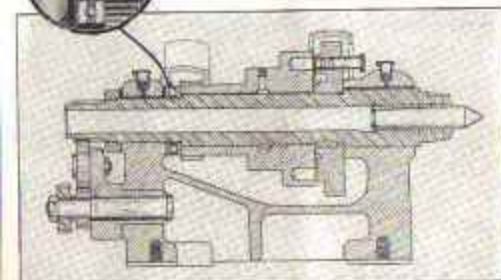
Cross Section Drawing of 9-inch "Workshop" Lathe Headstock
